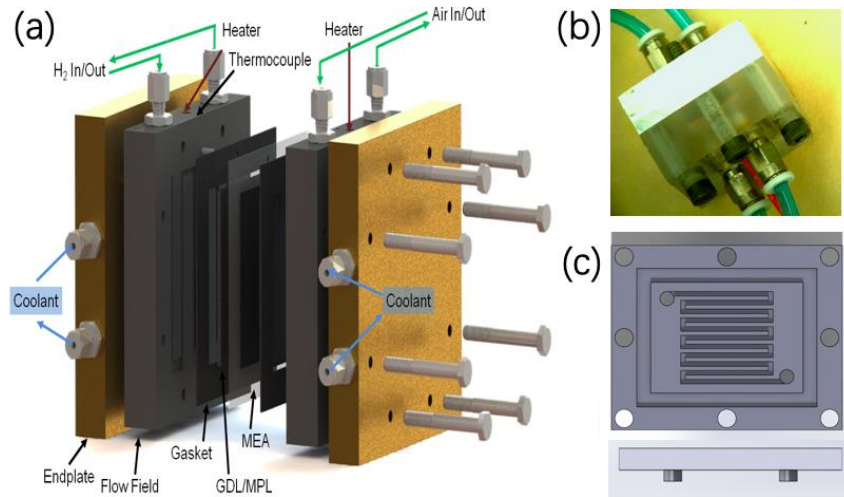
(a) An experimental PEM fuel cell and its inlet/outlet fittings on sides [22]; (b) A small PEM fuel cell with a 1 cm<sup>2</sup> MEA [23]; (c) Design of a 3D printing bipolar plate (BP) with the side view of the 3D printing plate with inlet/outlet fittings on the BP.
